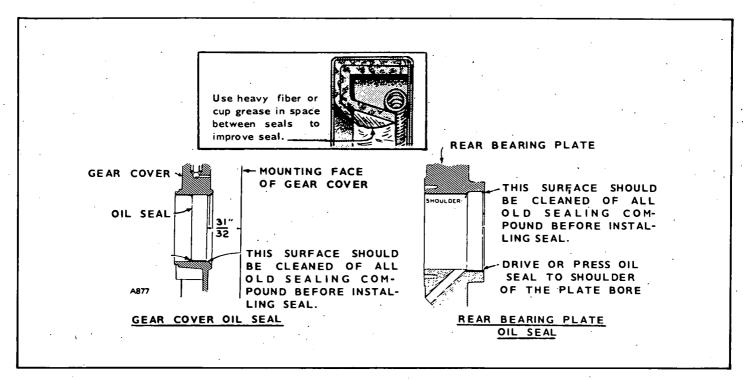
GEAR COVER AND REAR BEARING PLATE OIL SEALS
